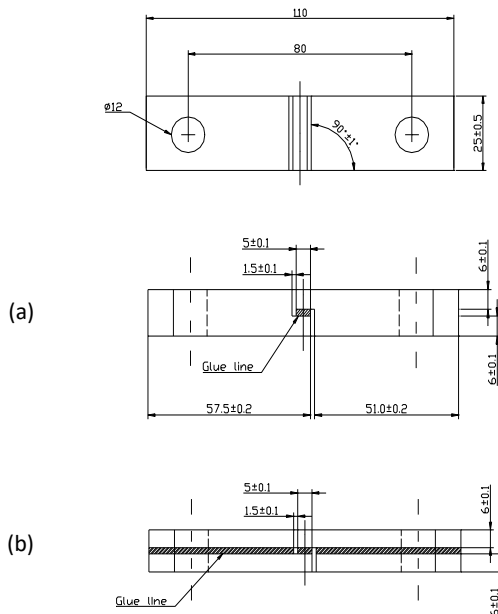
TAST specimen: (a) pre-shaped adherends; (b) bonded sheets (dimensions in mm)
